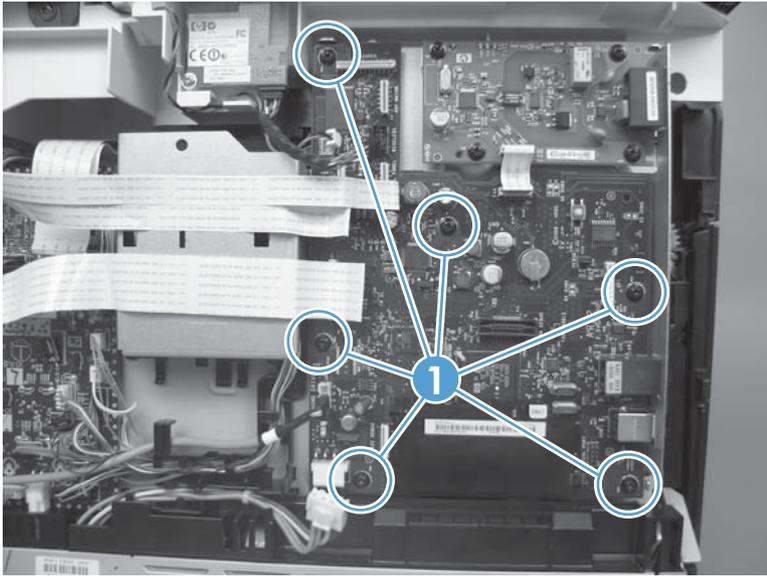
Remove the formatter PCA, fax card PCA, and support bracket (3 of 8)
